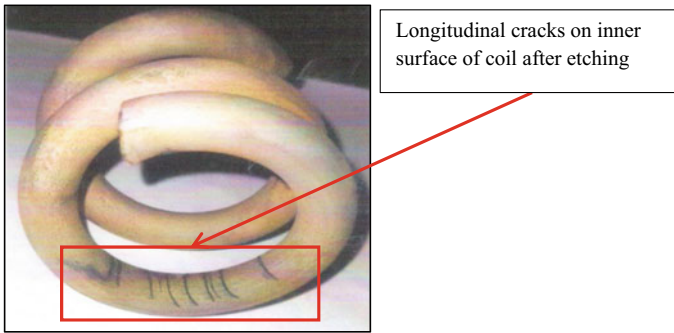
Longitudinal cracks on inner surface of coil after etching
